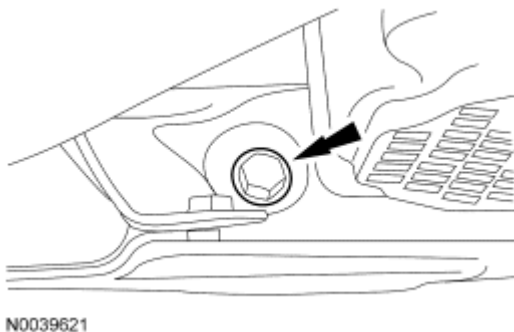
Locating Lower Control Arm-To-Subframe Bolt
